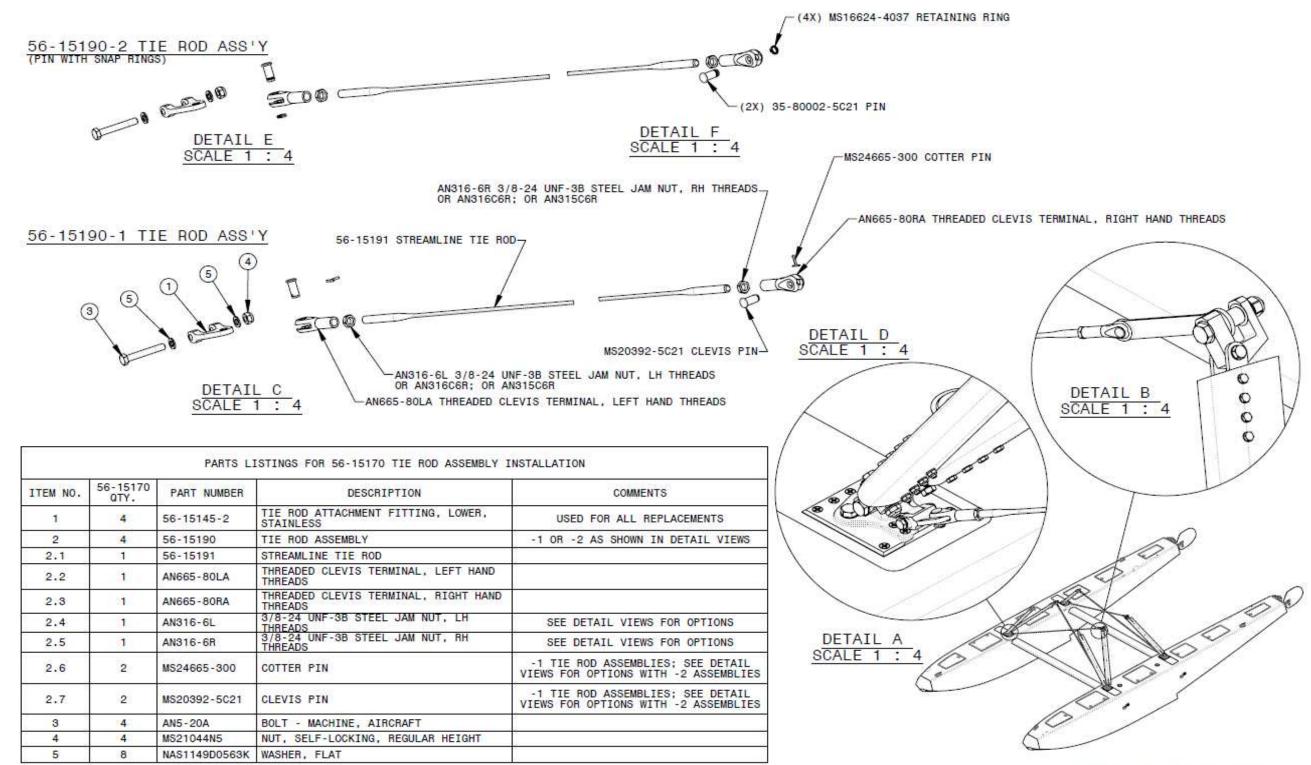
Parts Listings for Flying Wires (Tie Rod Assembly) Installation, 56-15170
